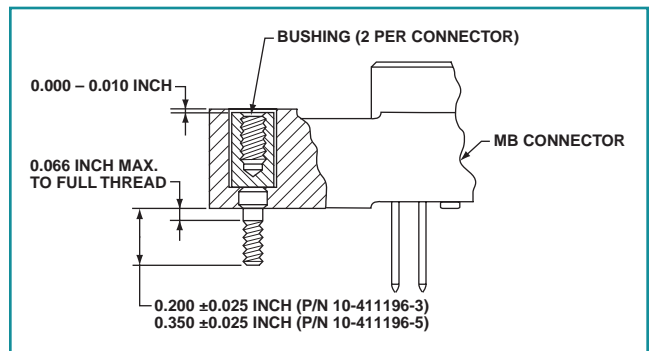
ASSEMBLY OF LOCKING/MOUNTING BUSHING INTO MB CONNECTOR
